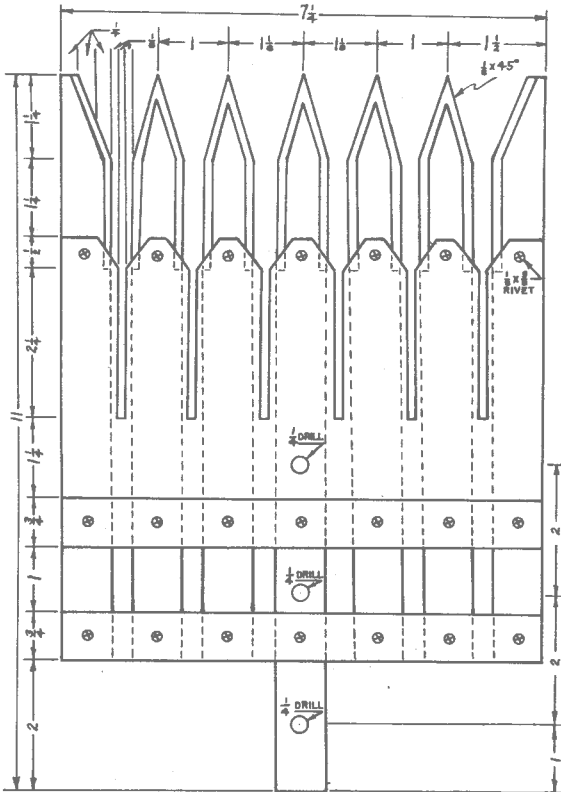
"Inside" plan view of the tine-cutter subassembly. (Dimensions are in inches.)
